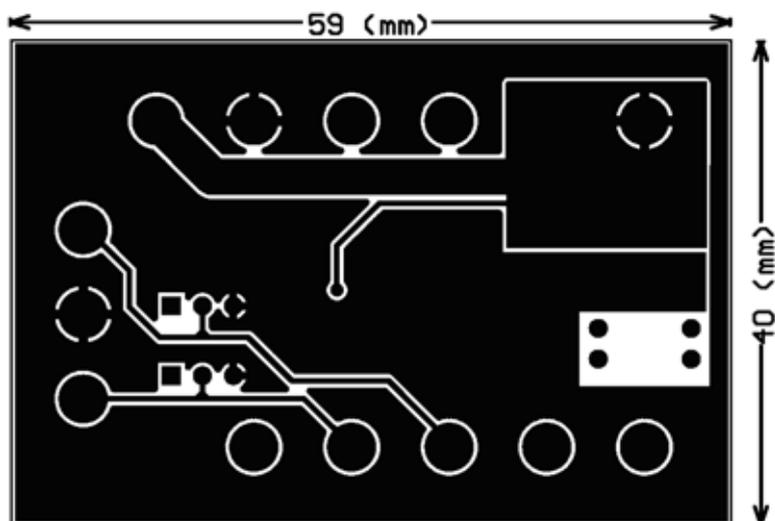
LM3407 Evaluation Board PCB Bottom View
